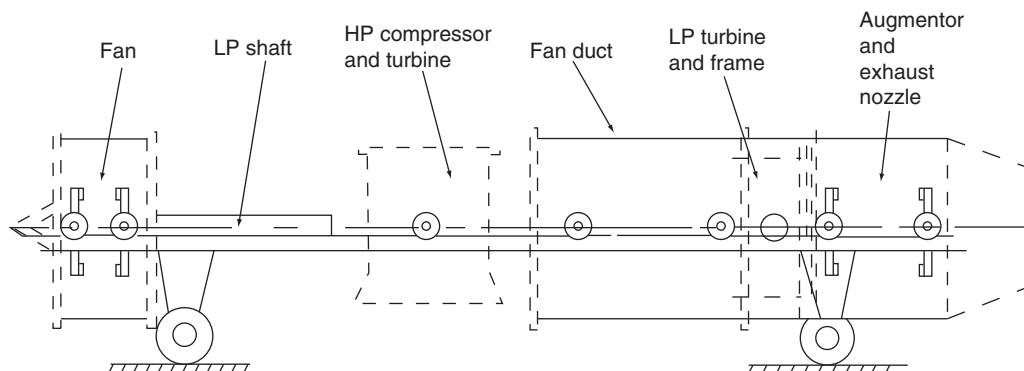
Modular engine disassembly and core access [19-2].
